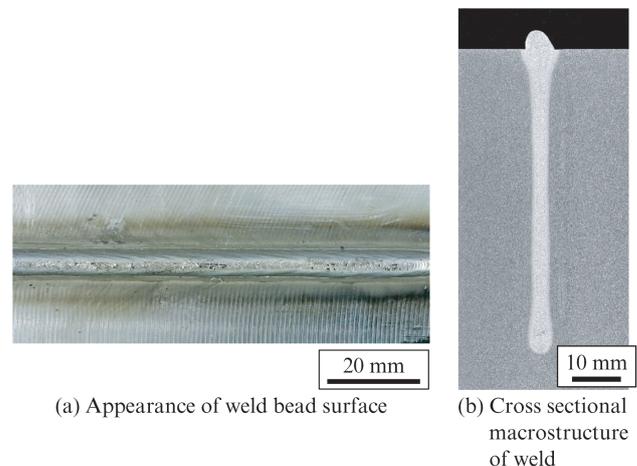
Example of high-power fiber laser welding in vacuum (Atmospheric pressure: 100 Pa, Laser power: 25 kW, Welding speed: 0.5 m/min, Melt run)
